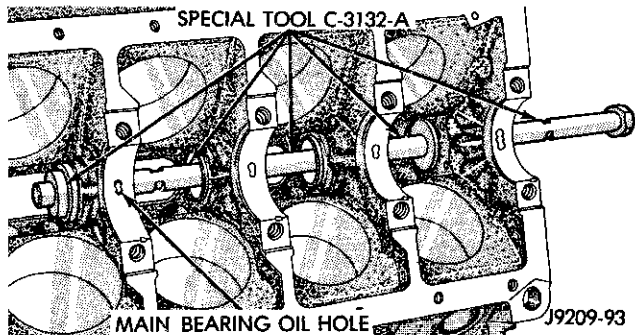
Camshaft Bearings Removal/Installation with Tool C-3132-A
